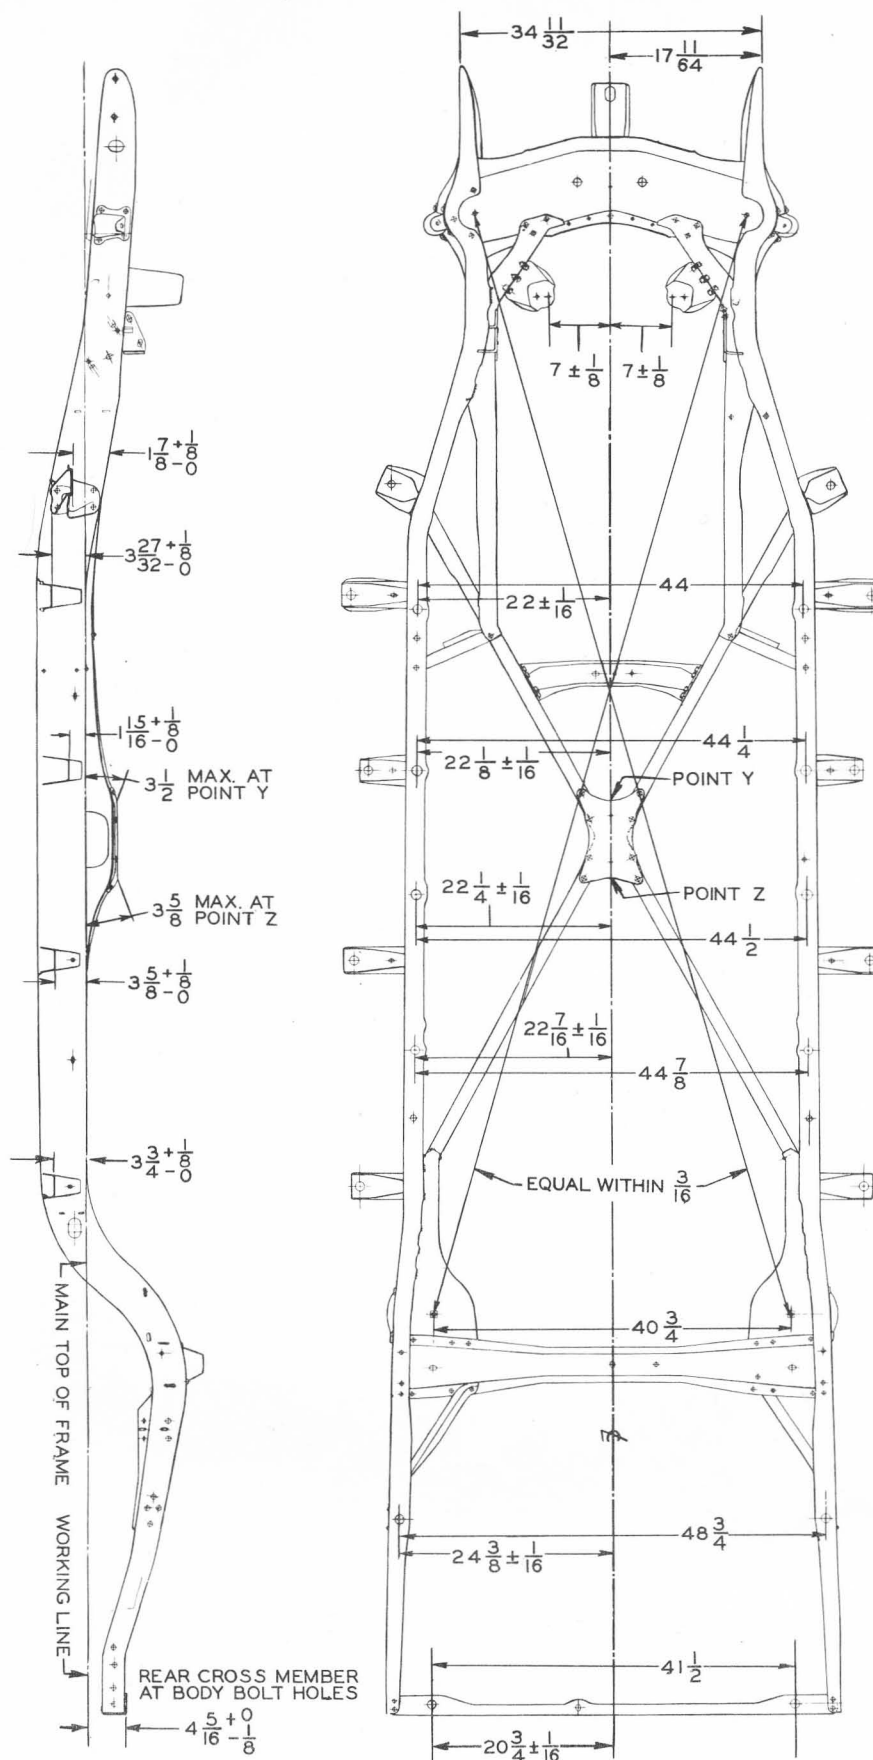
Frame Checking Dimensions—1948 Series 50
